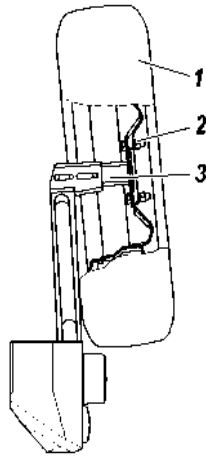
Spare wheel mounting (UAZ-390995 "Expedition" version):
